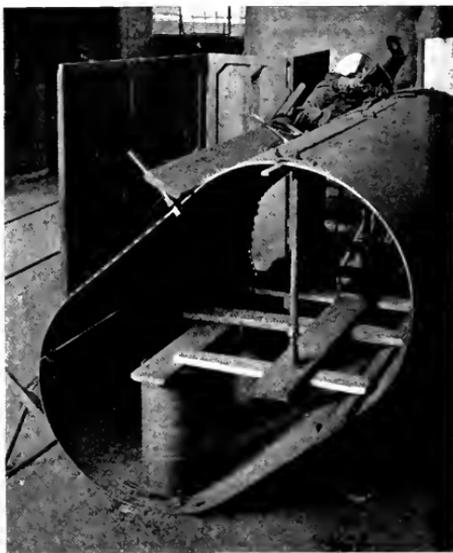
Tank Similar to One in Fig. 1 Placed for Welding, and the Welder Properly Outfitted Making the Weld
